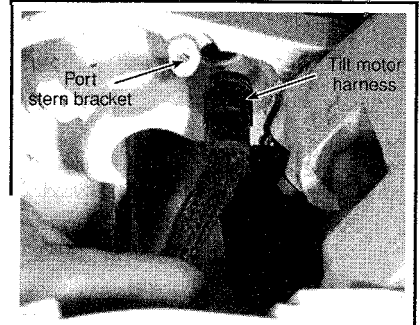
then feed the tilt motor harness through the opening in the stern bracket
